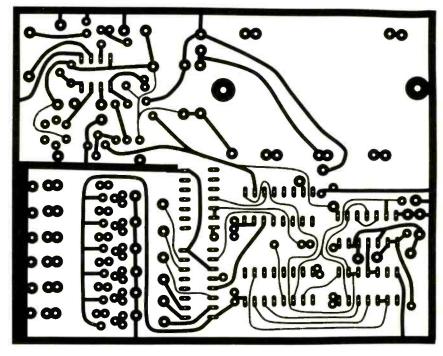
Actual-size etching-and-drilling guide for receiver/decoder pc board.
